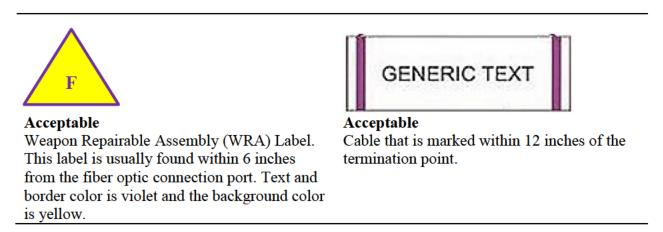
Examples of acceptable fiber optic label and cable marking.
